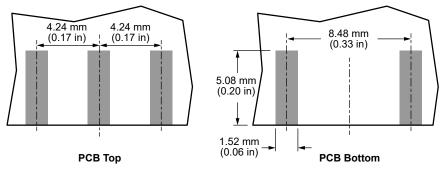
Recommended PCB Dimensions for the CONSMA020.042-G
